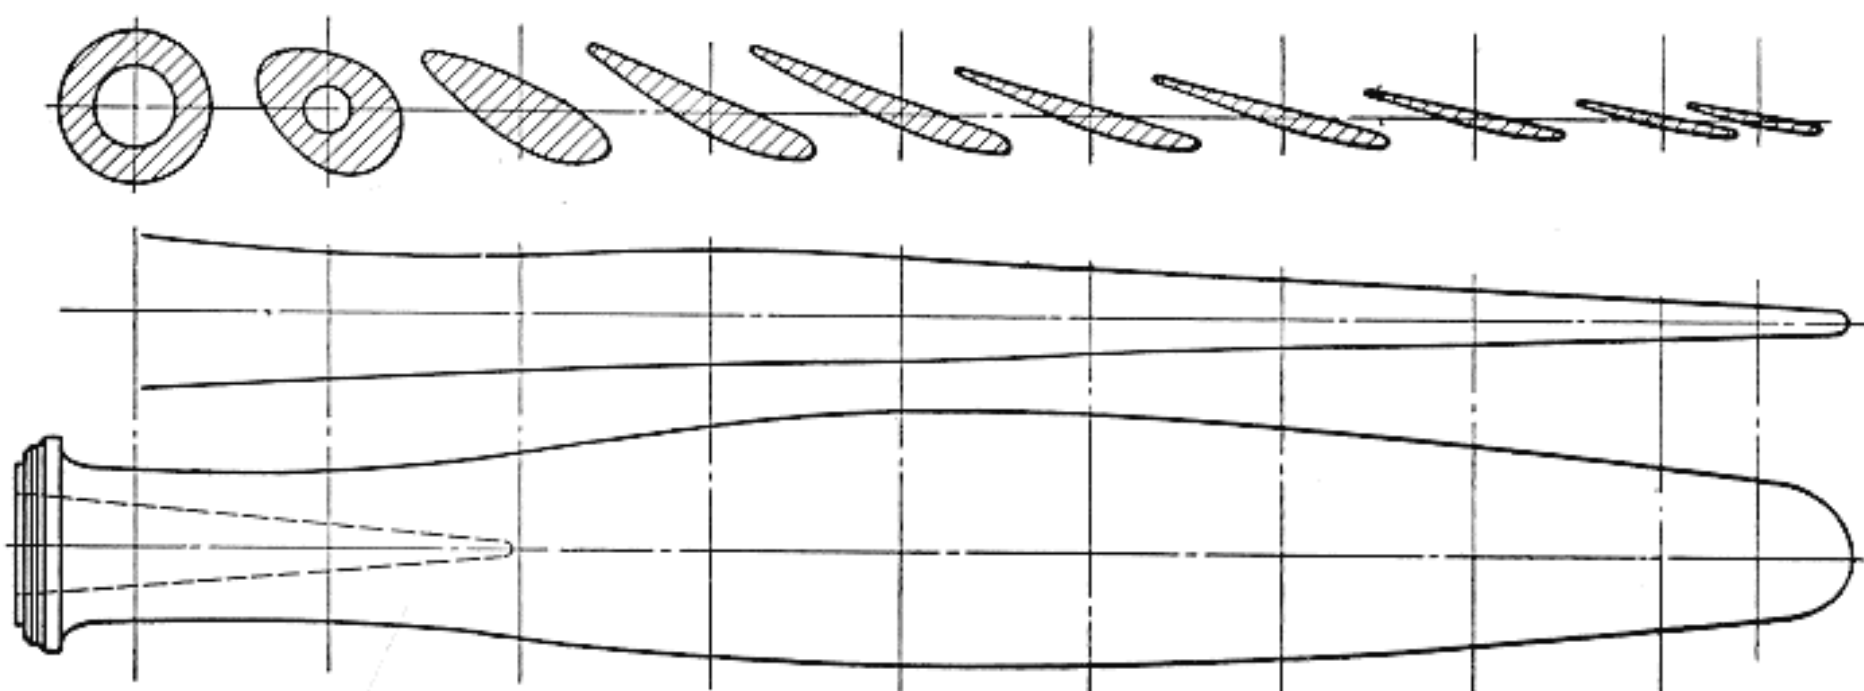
Removed sections. The cutting planes and the mating sections must be identified.
